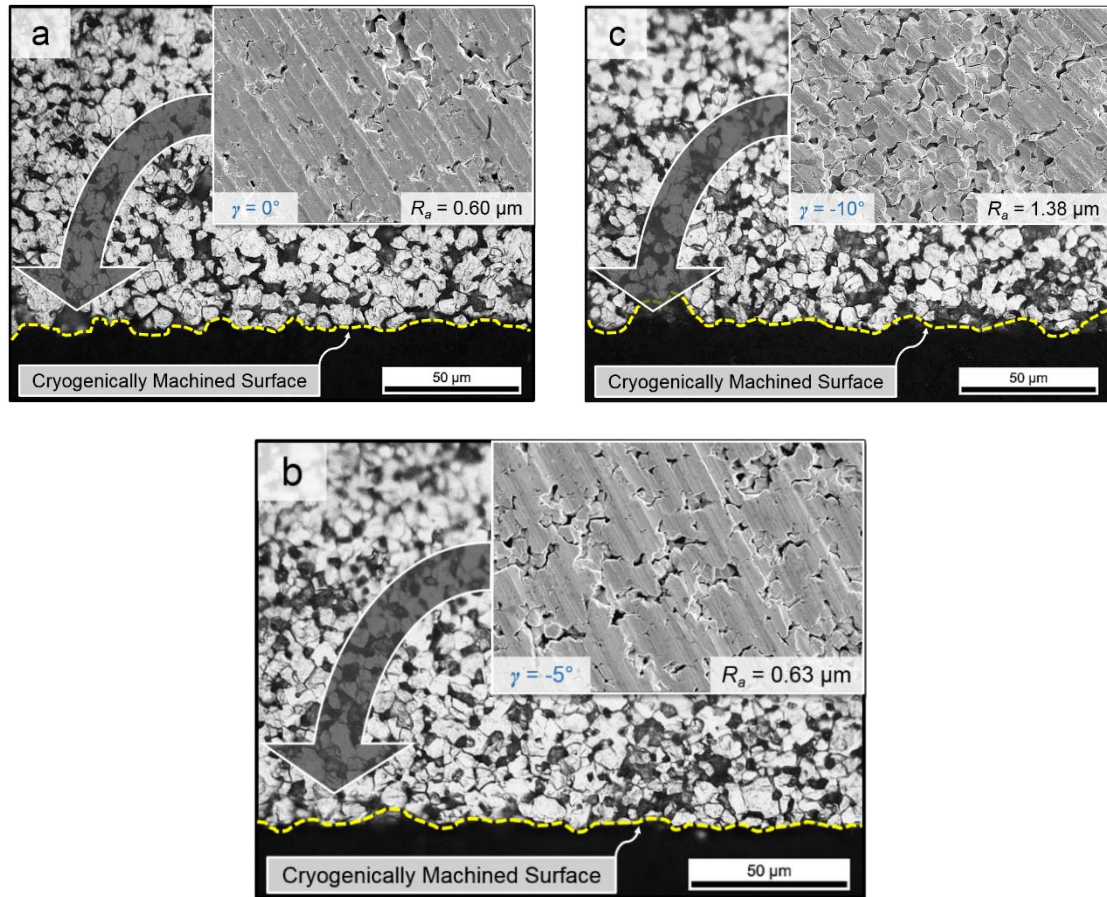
Combination of optical micrographs showing cross-sections of cryogenically machining tungsten as well as SEM micrographs of the machined surface. Surface roughness of the machined surface is included in the bottom left hand corner and each set of micrographs corresponds to a different rake angle, namely 0° (a), -5° (b), and -10° (c). The optimum surface morphology obtained can be seen in (b), which is a combination of low surface roughness and high surface porosity.
